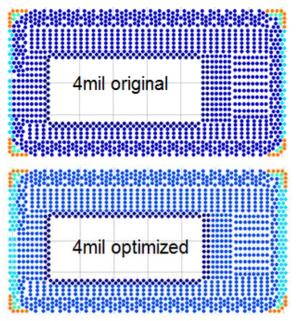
Original and optimized stencil design used on Product cavity array FCBGA package
